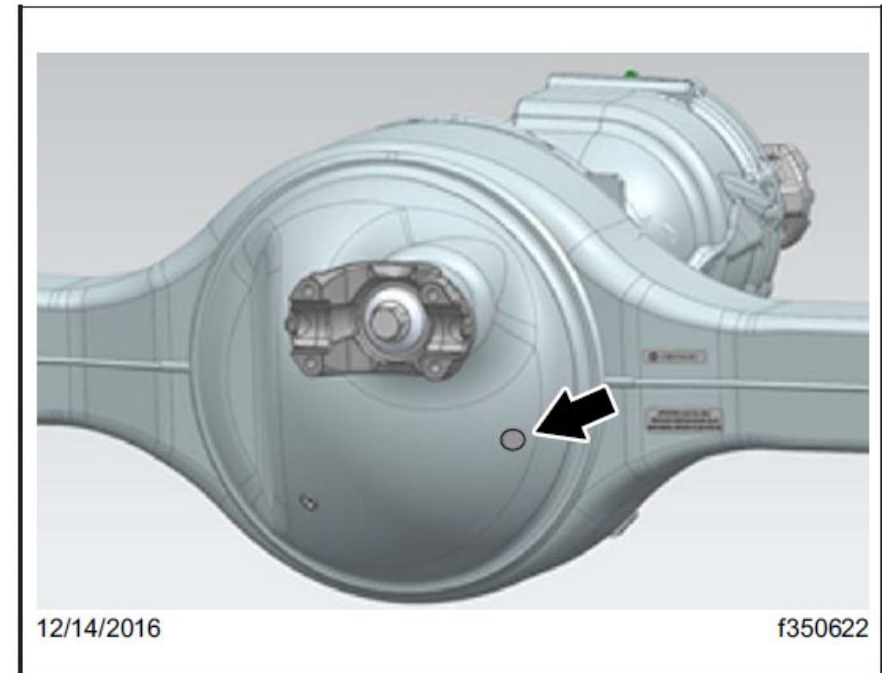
, Old Fill Plug Blocked with New Plug Inserted from Inside of the Carrier Housing
